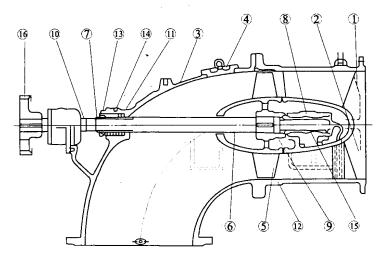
Construction of horizontal shaft type axial-flow pump
